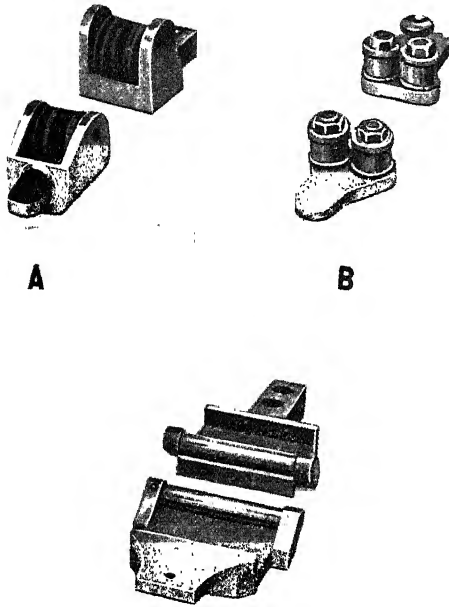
Grips used for bars, rings, and broad strips on the Bureau of Standards machine.
